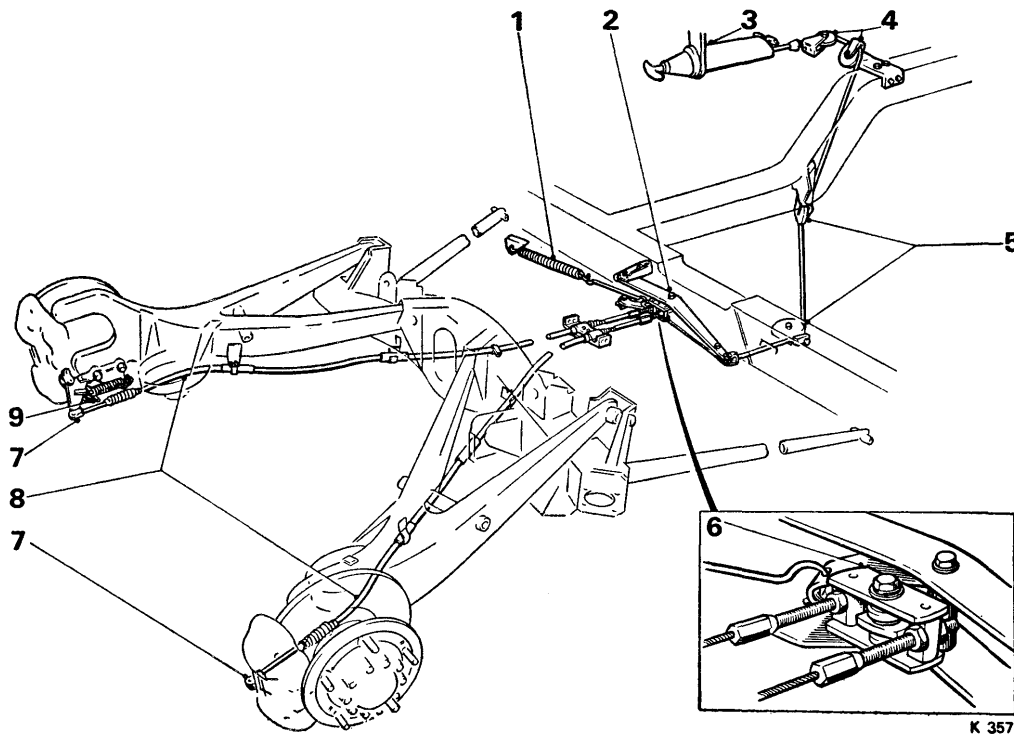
HAND BRAKE LINKAGE—LATE L.H.D. CARS
